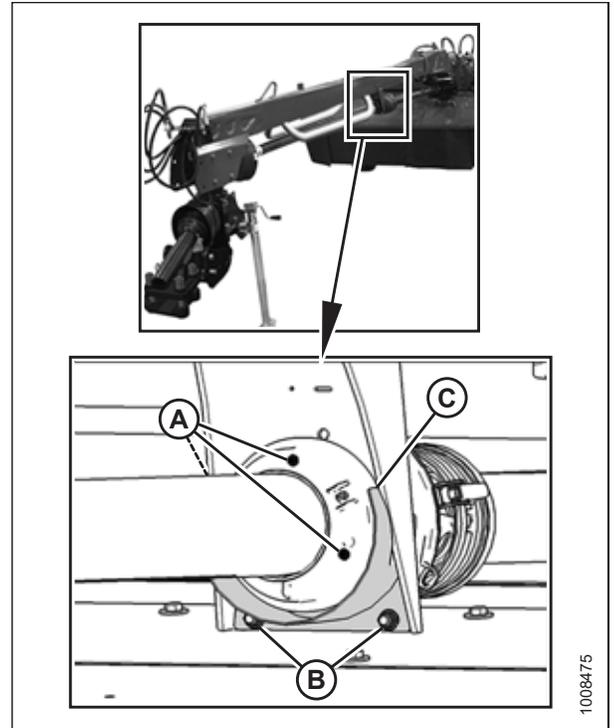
Driveline Cover and Shield Installed at Center Support
